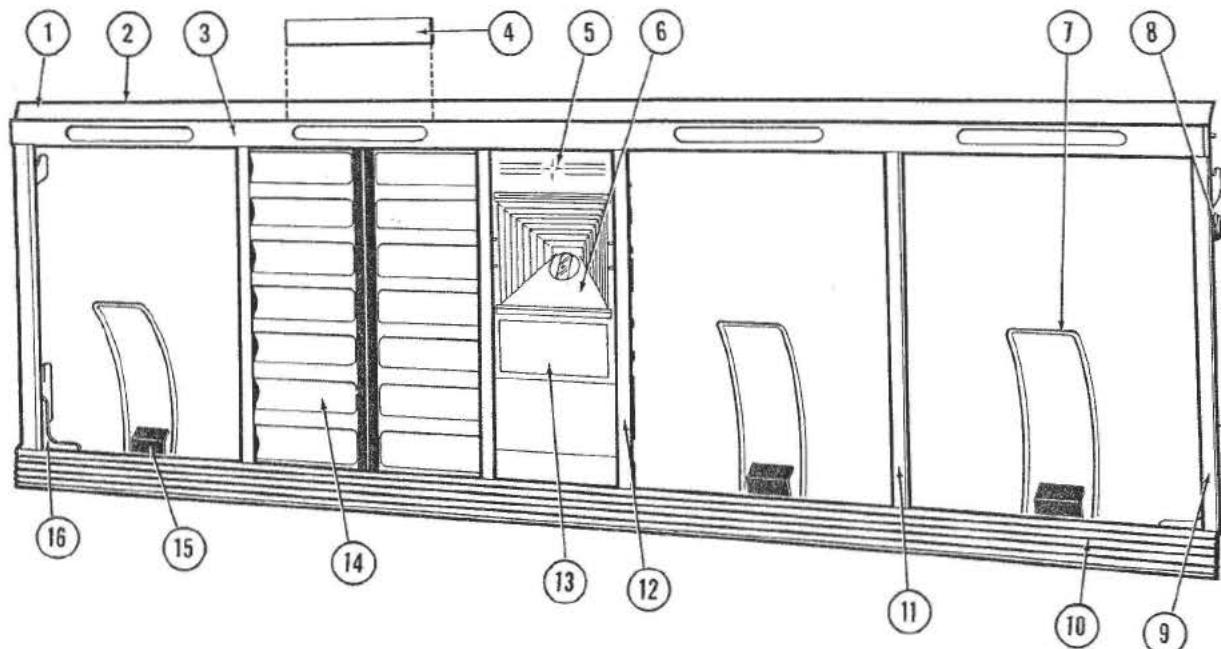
PROGRAM HOLDER ASSEMBLY, 2404-2404S
